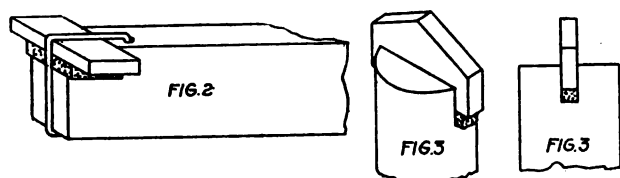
and 3. Holding the Tip for Welding and a Boring Bar Tip.
